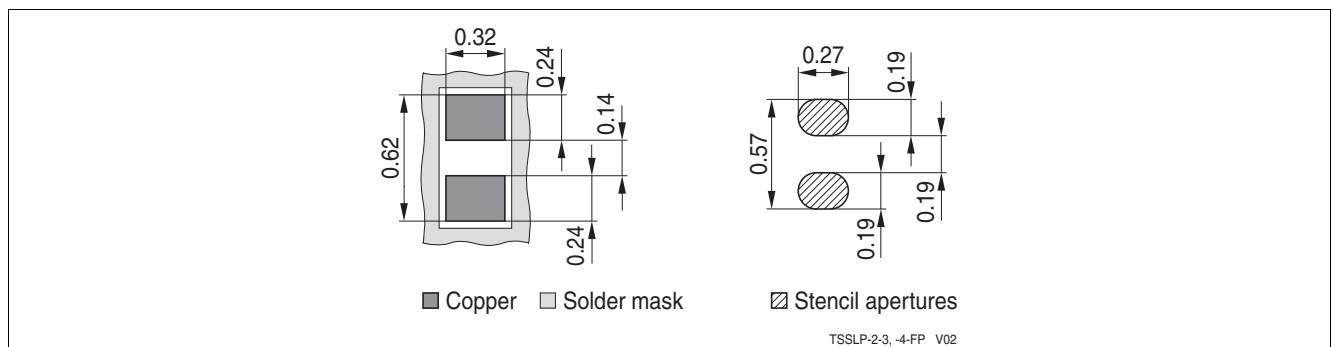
TSSLP-2-4 Footprint (dimension in mm)
